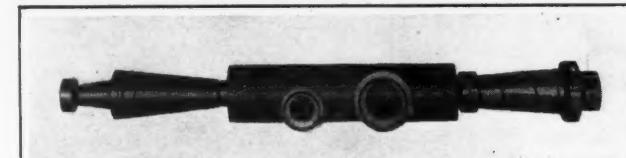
Grinding Wheel Spindle furnished with a Tapered Bearing at Each End
